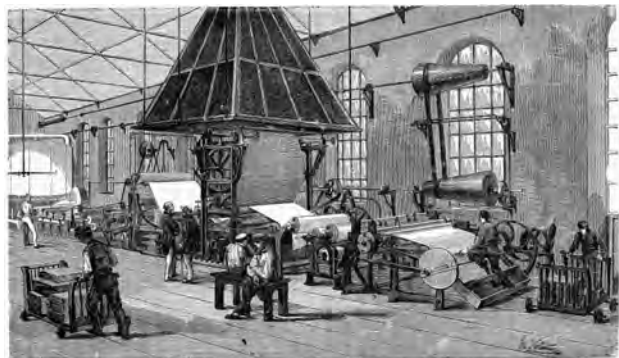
New Technology in Paper Milling Plants: The Foudrinier Machine
